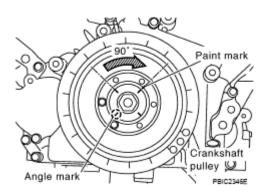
Identifying Paint Mark On Crankshaft Pulley Courtesy of NISSAN MOTOR CO., U.S.A.
